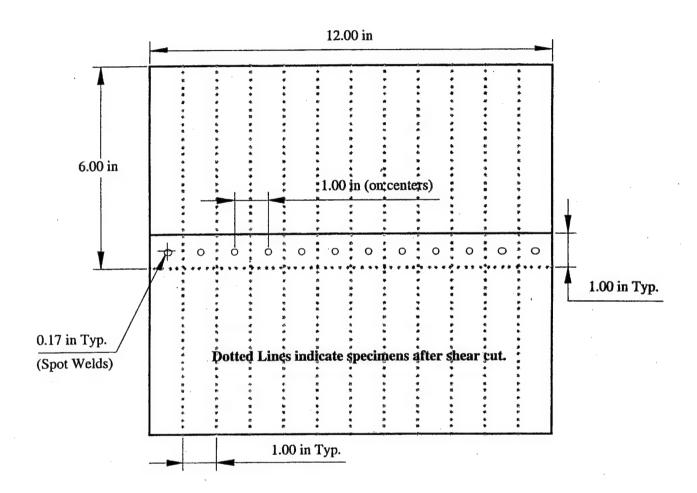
Sheet Weld Layout and Final Fatigue/Shear Specimen Dimensions.
